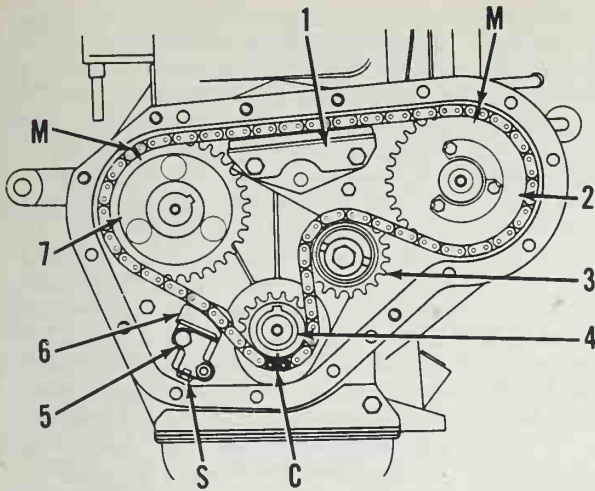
Drawing showing timing chain and sprockets on models so equipped.
